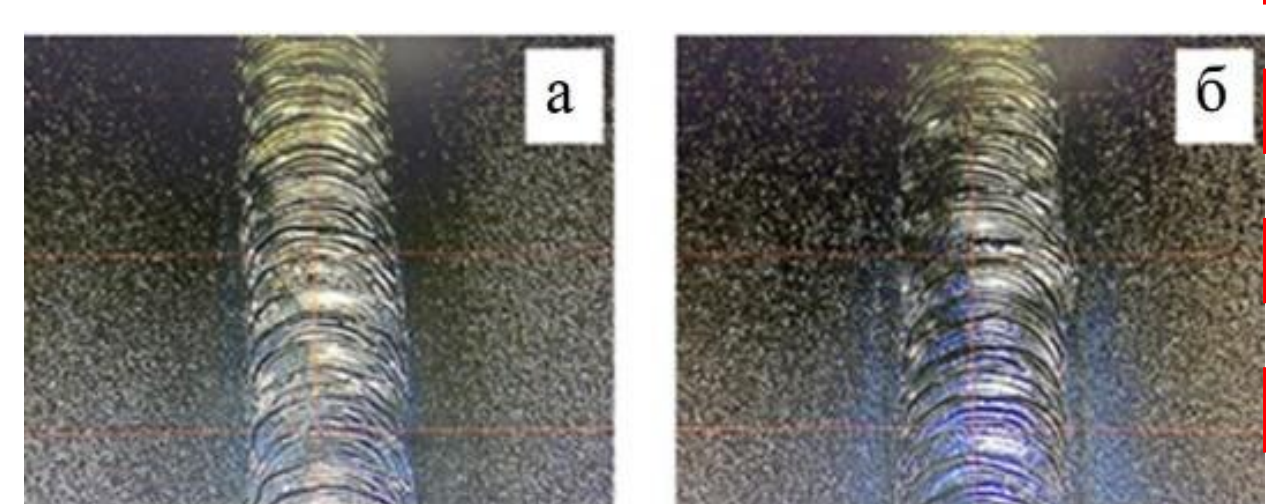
Appearance of the welded joint depending on the voltage and pulse duration: a) 280 V, 6 ms; b) 300 V, 6 ms
